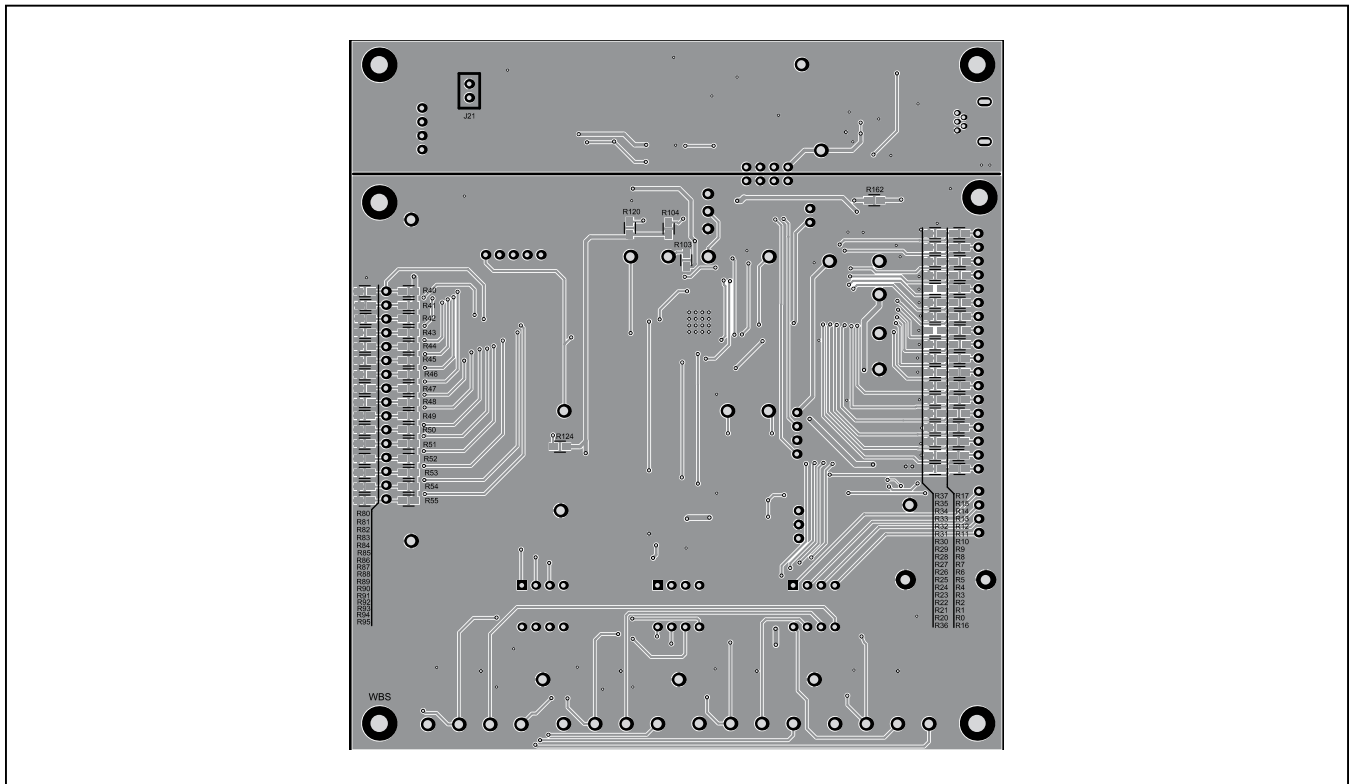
MAX34461 EV Kit PCB Layout—Bottom
